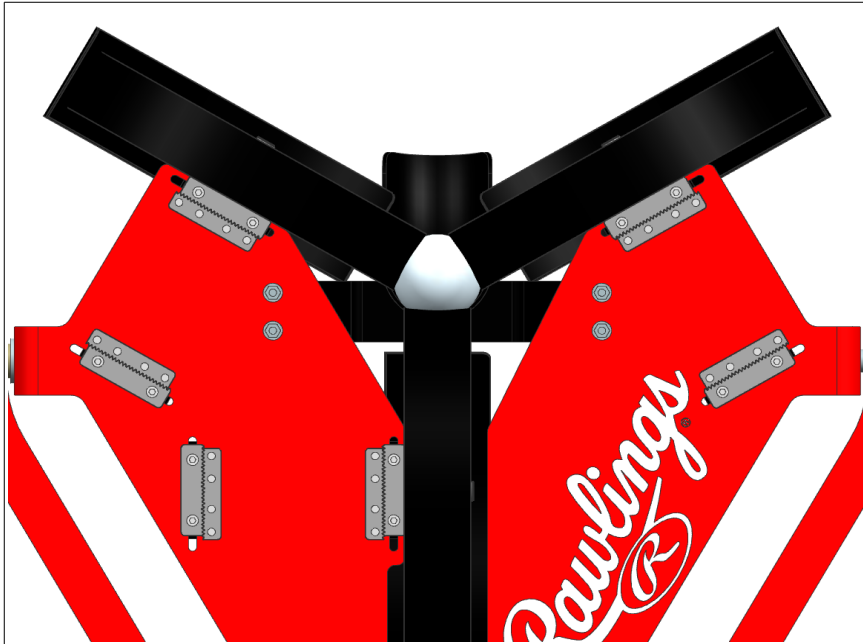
Typical motor / wheel positioning for real baseballs - plates that move with motors are 1 step in from center position.
